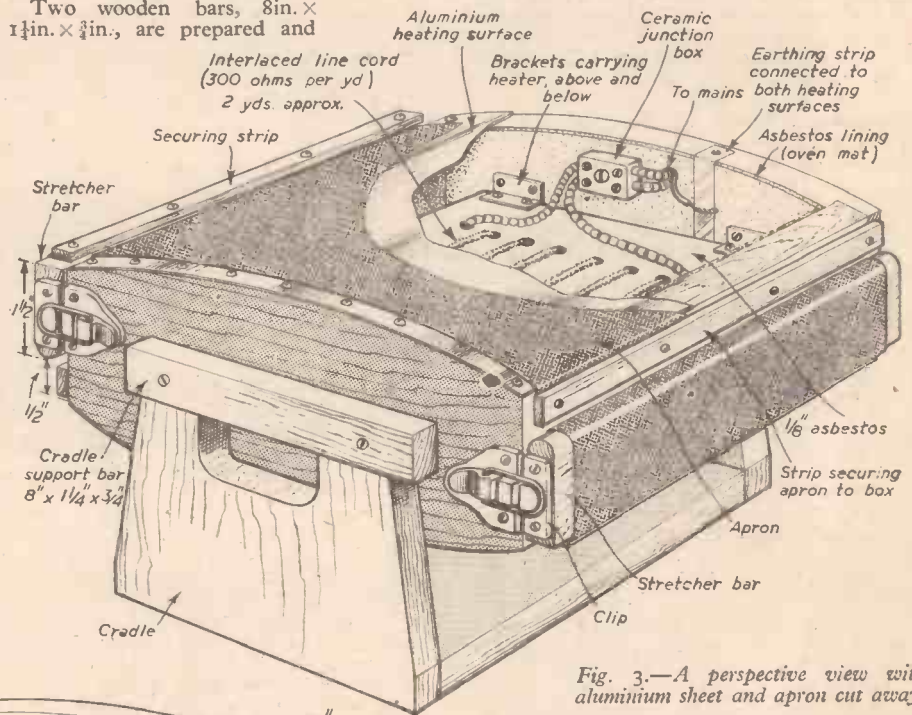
A perspective view with aluminium sheet and apron cut away.
